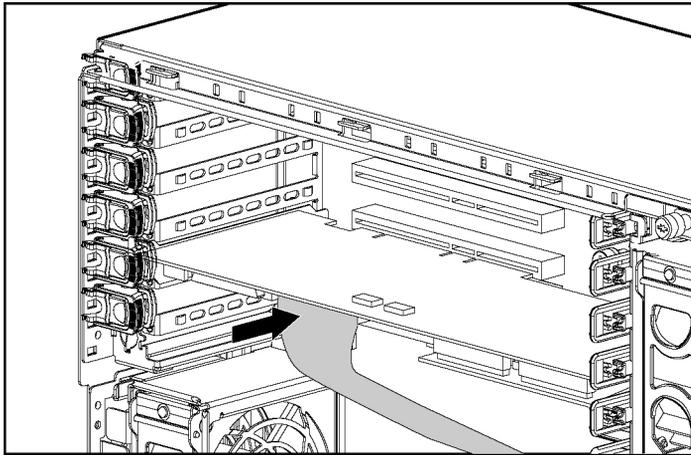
Connecting the SCSI cable to the SCSI controller option
